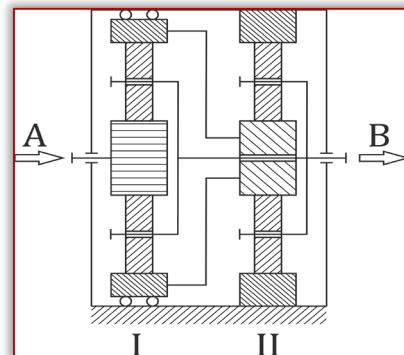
Schematic overview of the two-carrier, single speed planetary gear train S13WN
